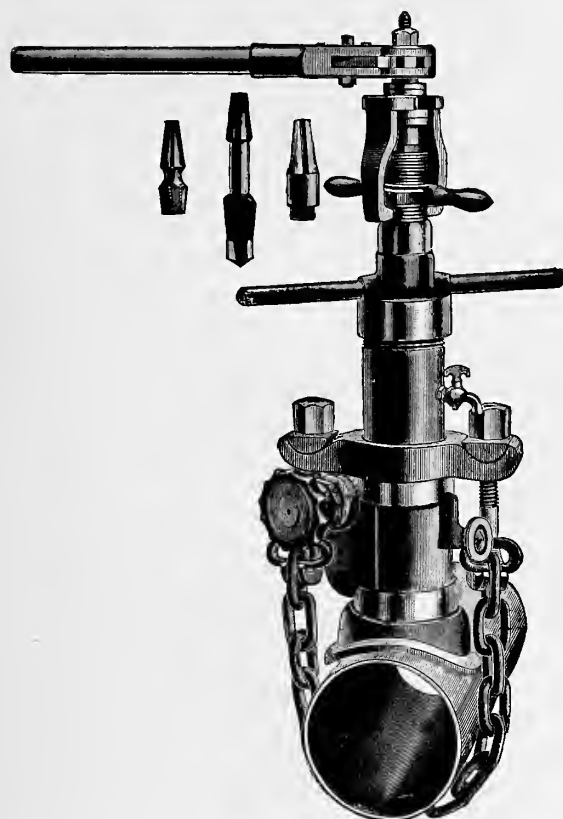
MUELLER WATER TAPPING MACHINE.
